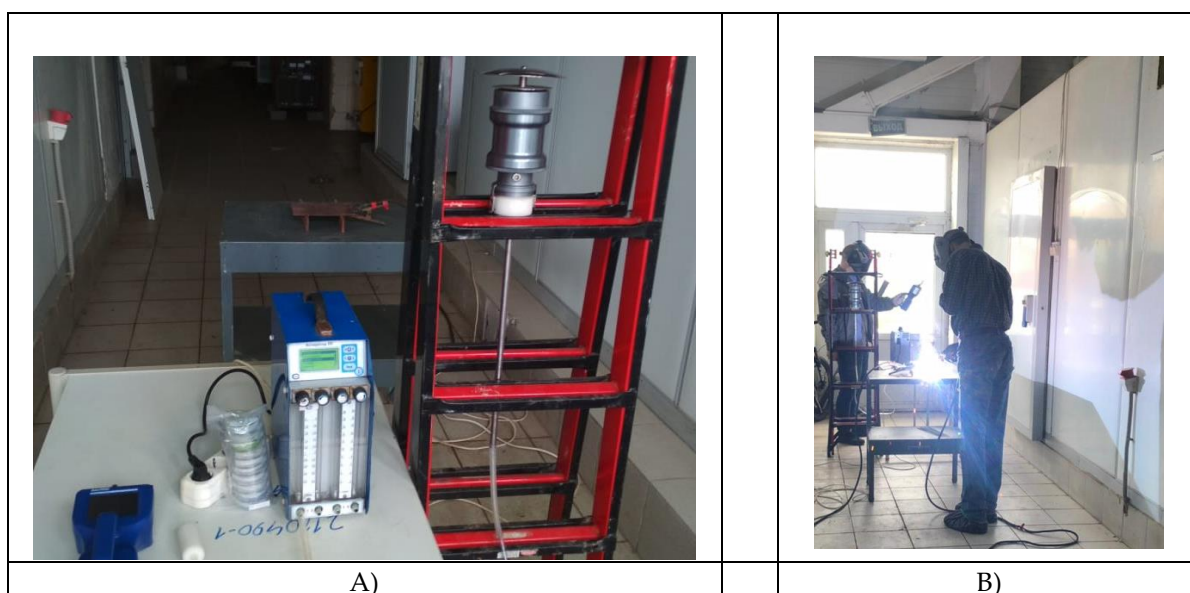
Taking air and PM samples during welding. A) Measuring instruments, B) Welding process
